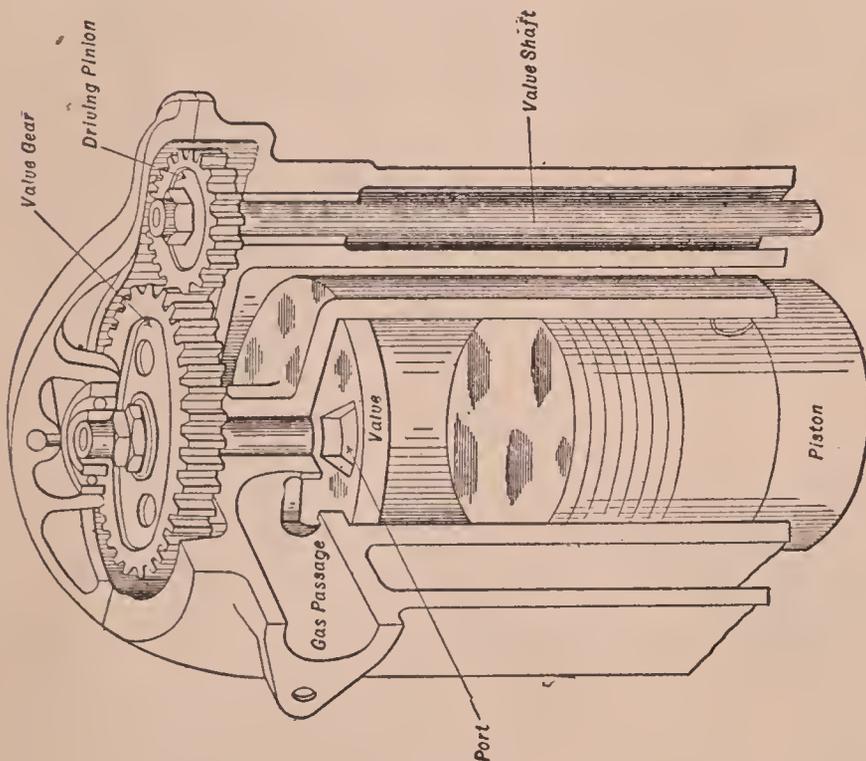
Sketch Depicting the Method of Operating the Reynolds Disc Valve Motor, and Indicating Also the Method of Driving the Discs by Vertical Shaft.
